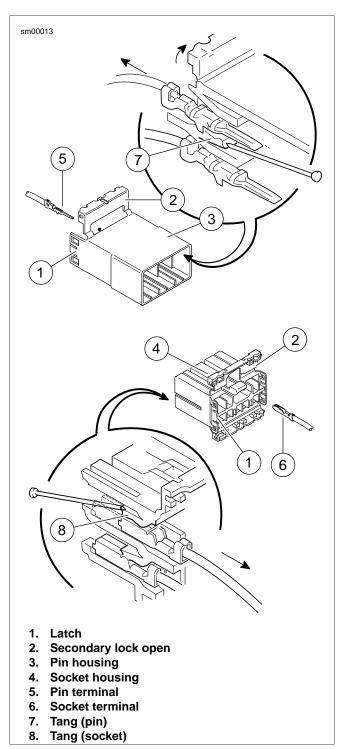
AMP Multilock Connector: Socket and Pin Housings
